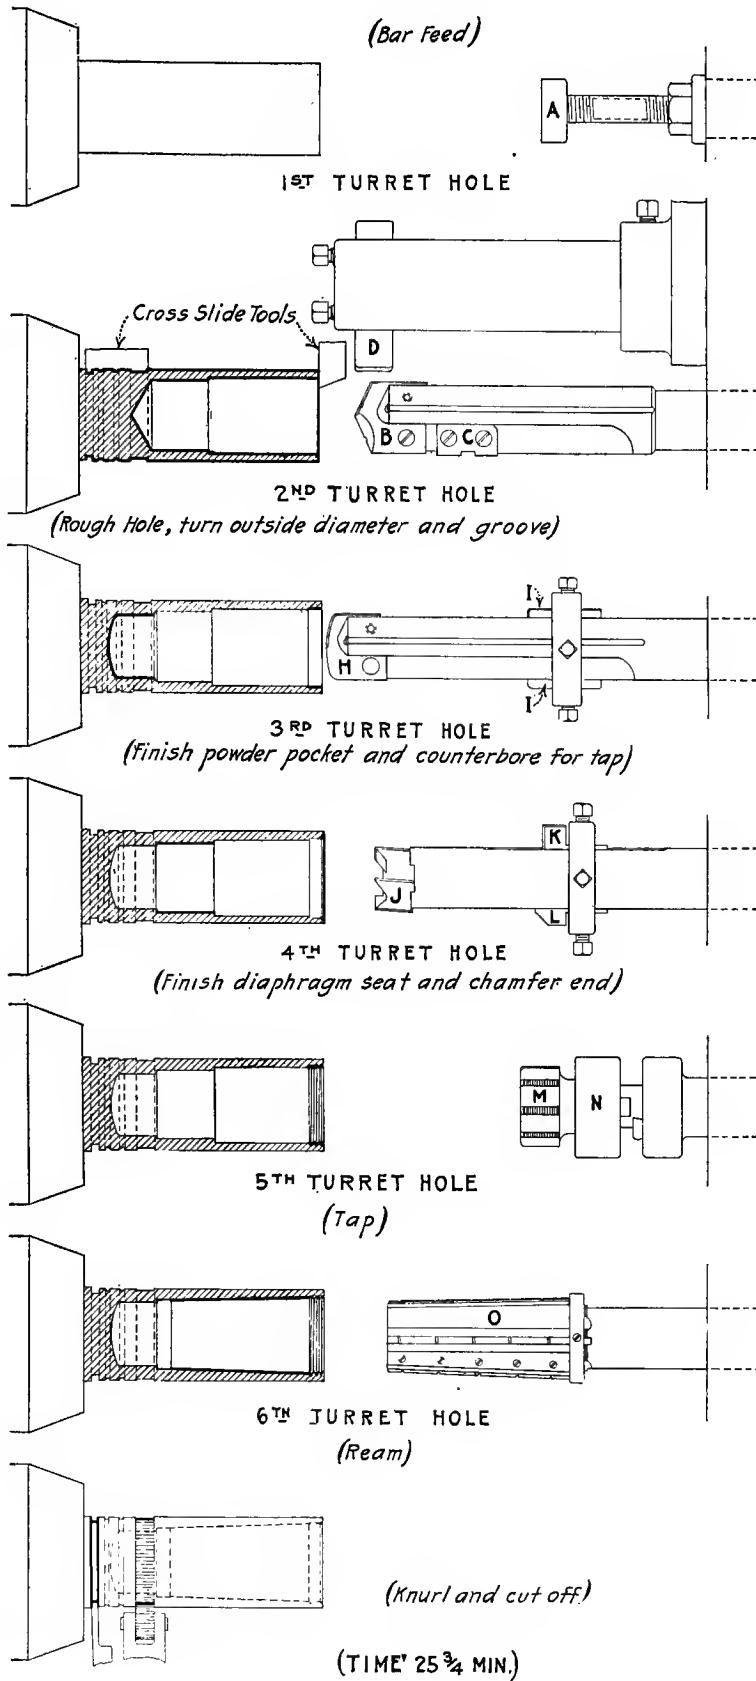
MACHINING A 3-IN. SHRAPNEL CASE FROM BAR STOCK
